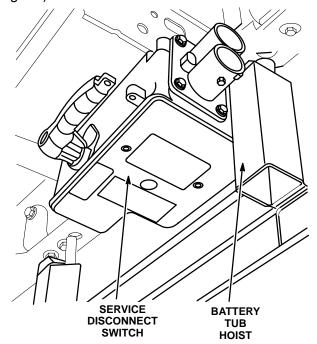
Lifting Device and Service Disconnect (17) Remove remaining battery tub retaining bolts (16).
